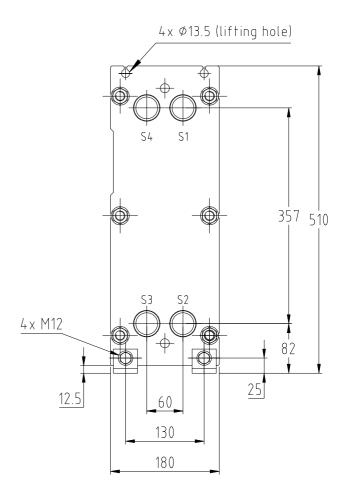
PLATE HEAT EXCHANGER GC-12PI DIMENSIONS, MM
